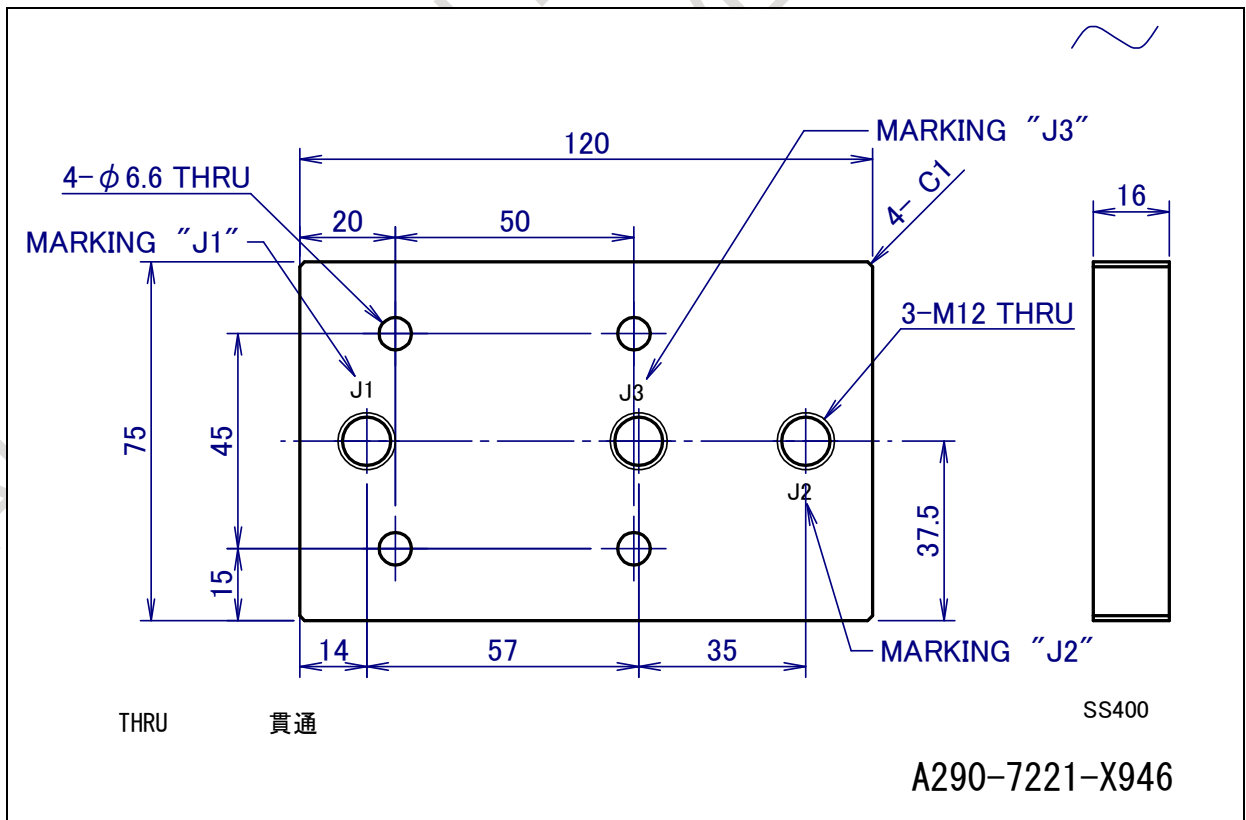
(d) J1/J2/J3-axis reducer rigging fixture
